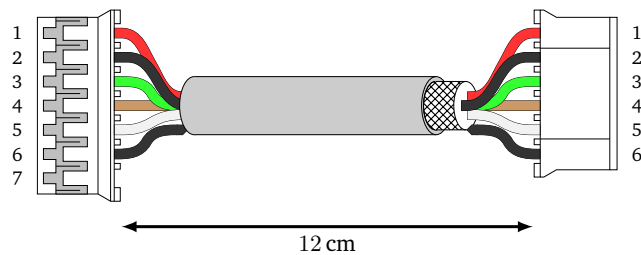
Display cable used to internally connect the display board with the analog board. The 7-pin header is deprecated and will be replaced with a 6-pin header.
